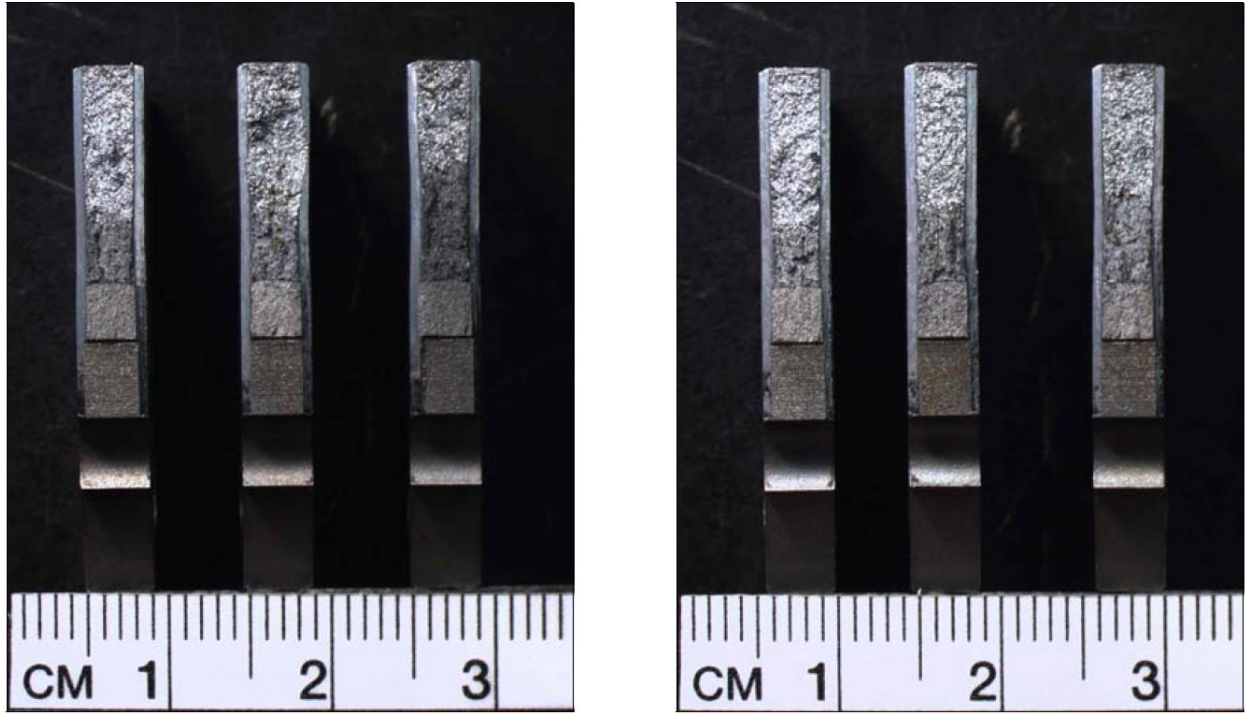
The Sample Fracture Surfaces of Charpy Specimens (20" Diameter Pipe)
